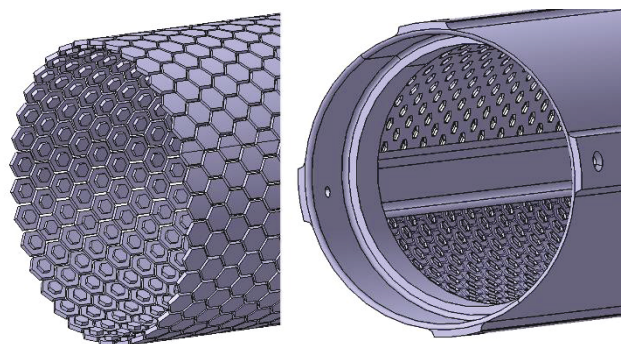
Left: negative CAD model of the honeycomb structure; Right: CAD of one segment
